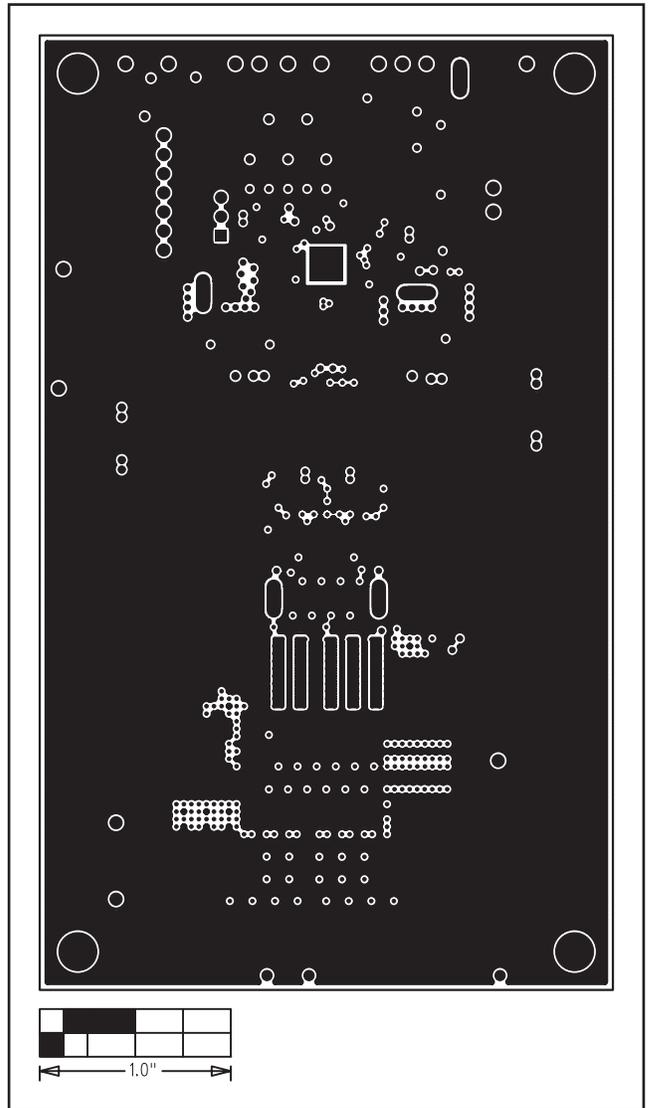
MAX17582 EV Kit PCB Layout—Internal Layer 7 (PGND Layer)
